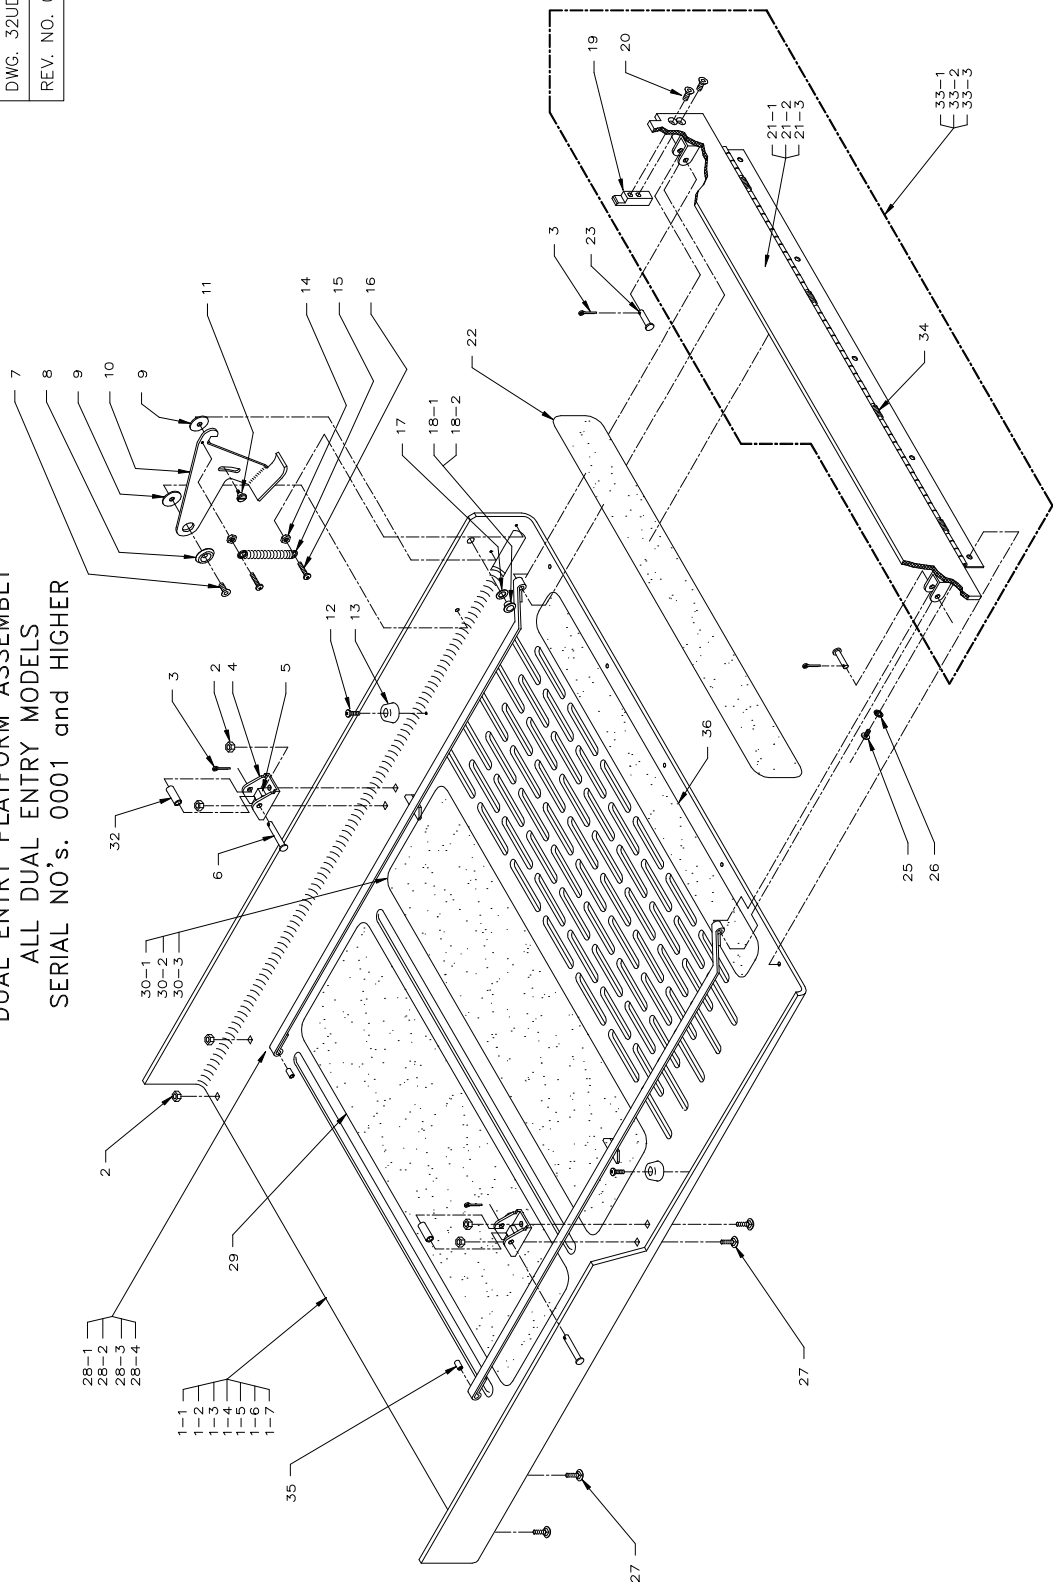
UNI-LITE DUAL ENTRY PLATFORM ASSEMBLY
